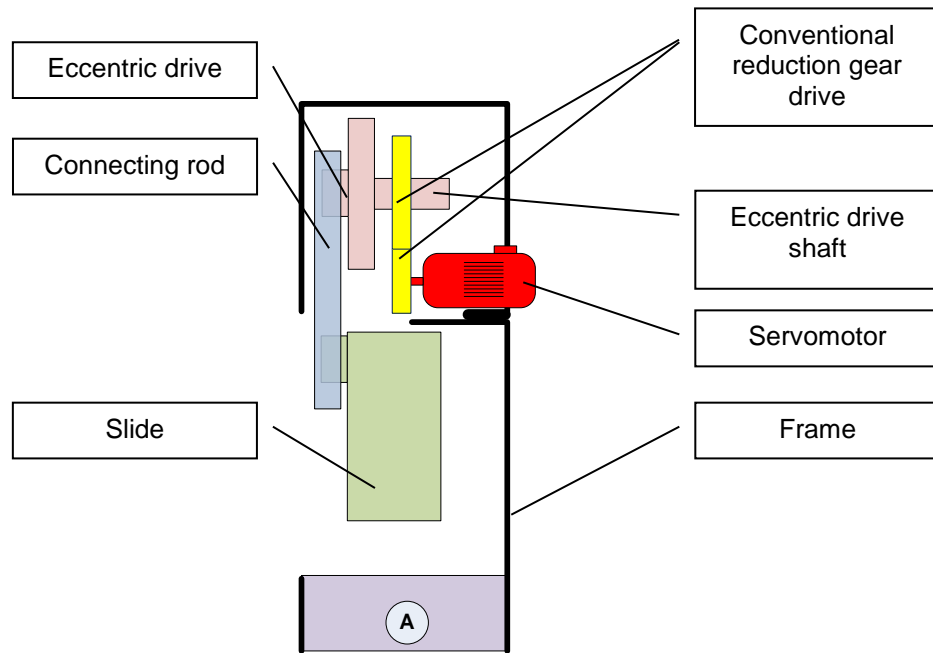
Diagrammatic view of a drive with a conventional reduction gear drive
